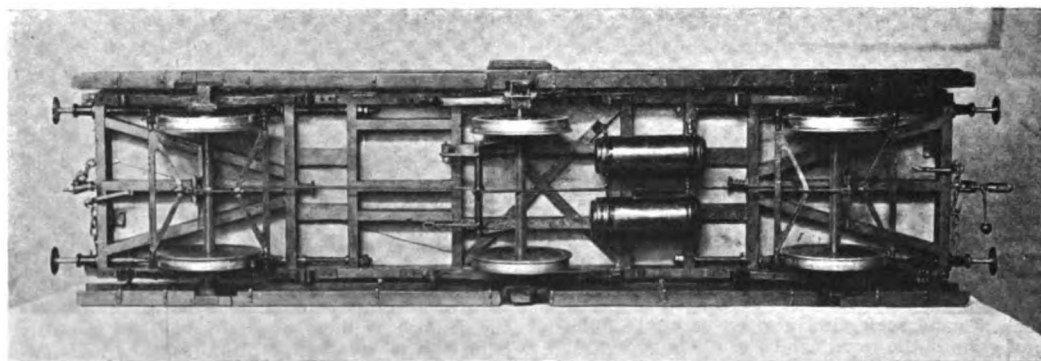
INVERTED PLAN OF G.N.R. BRAKE VAN.
